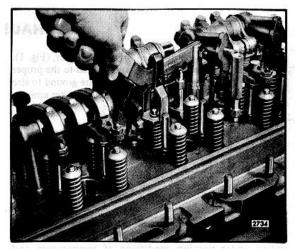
Removing Exhaust Valve Spring (Four-Valve Head Shown) using Tool J 7455
